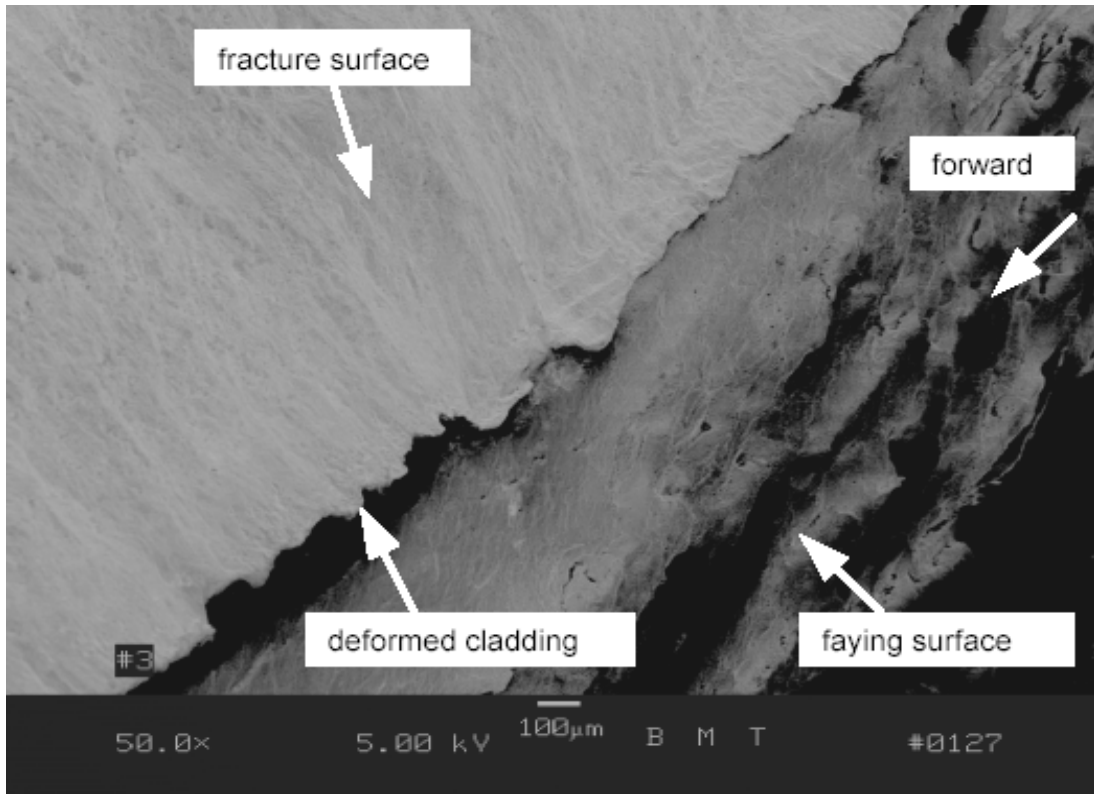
Scanning electron microscope photograph along the edge of the fracture common to the faying surface where the aluminum cladding remained near Hole 3. The fracture surface profile was slanted here.
